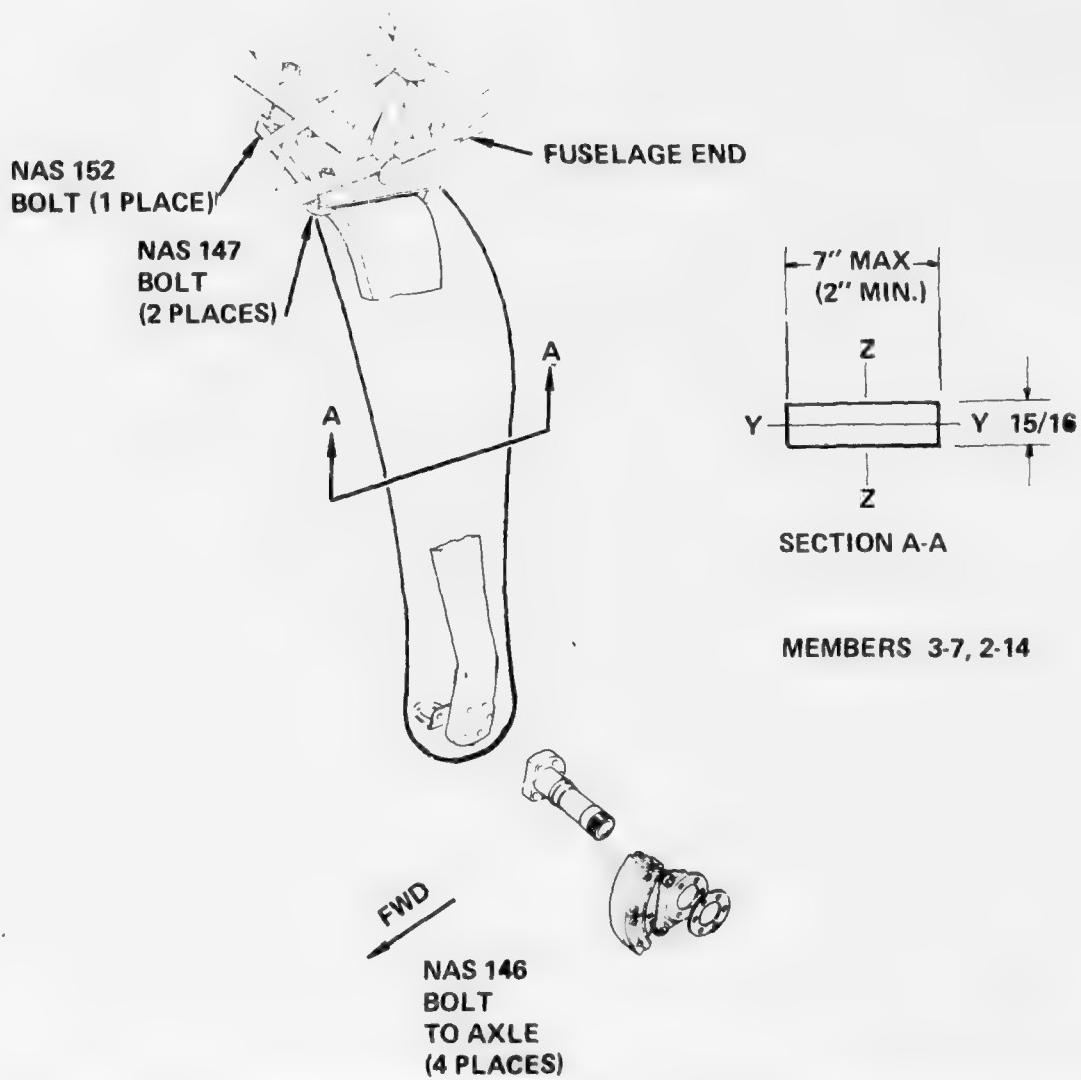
Main Landing Gear Structure Cantilever Spring Cross Section
